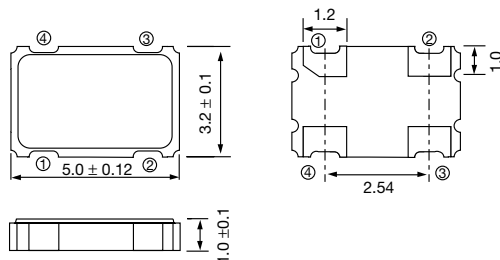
ECS-3961/3963 Series Top, Side and Bottom Views
